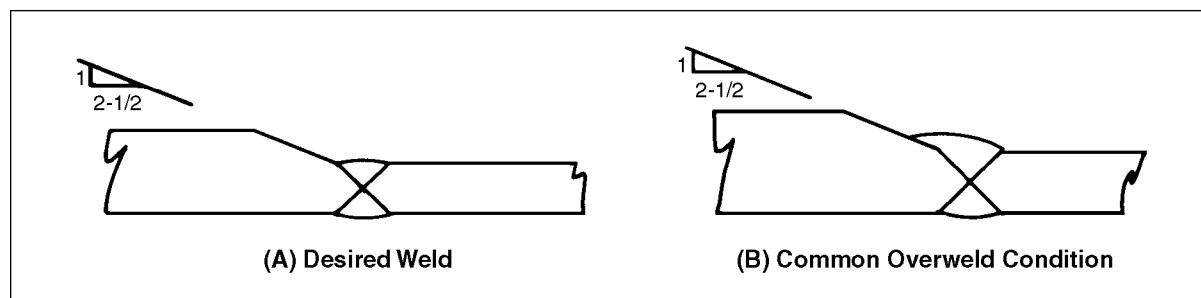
Effect of Overwelding on a Weld Cross Section
